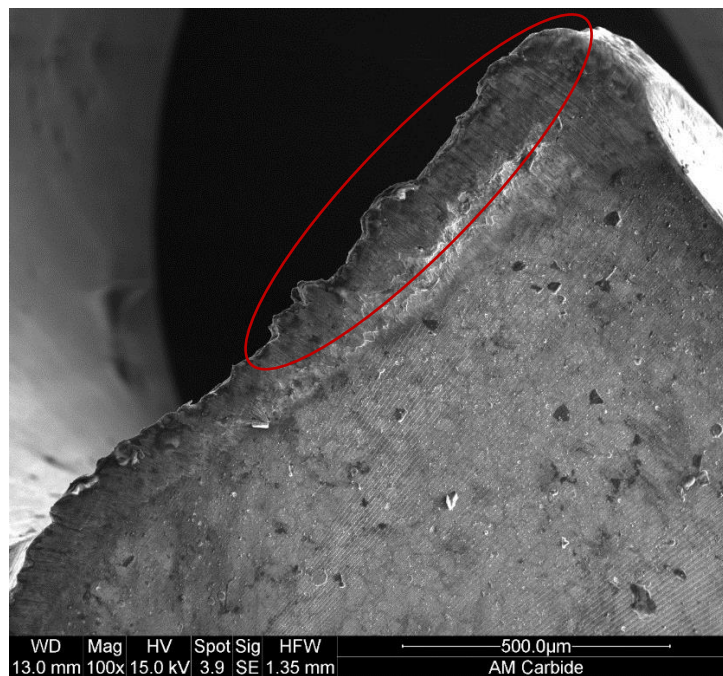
100x SEM top down view of the carbide drill bit cutting edge after drilling 60 holes in AM titanium.
